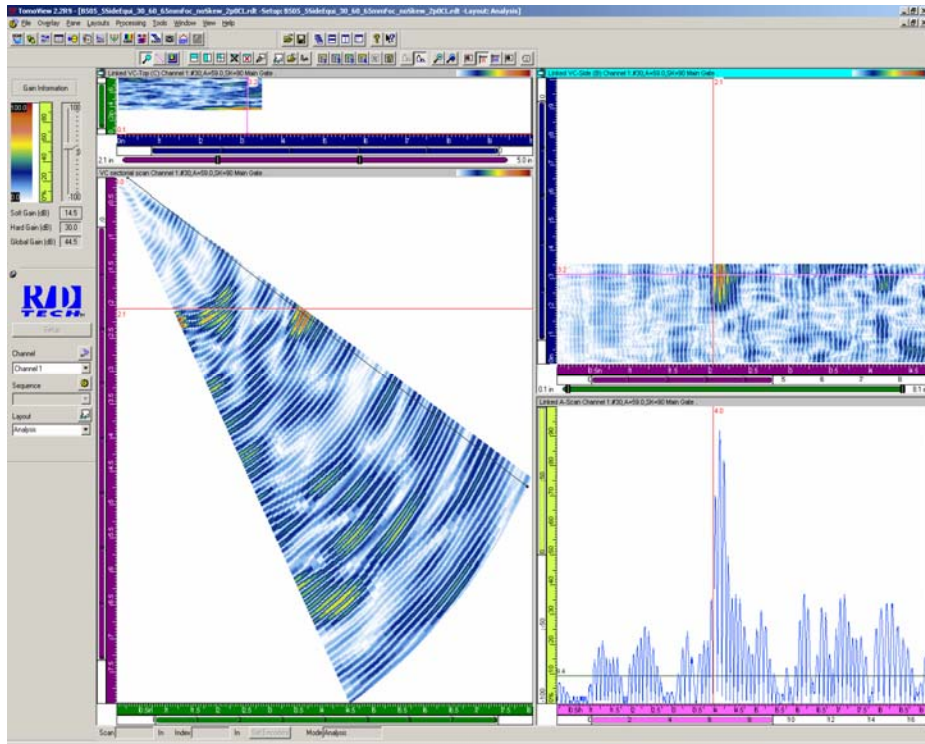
B505 Inspected from the Equiaxed Side of the Weld, Showing a Yes Detected
